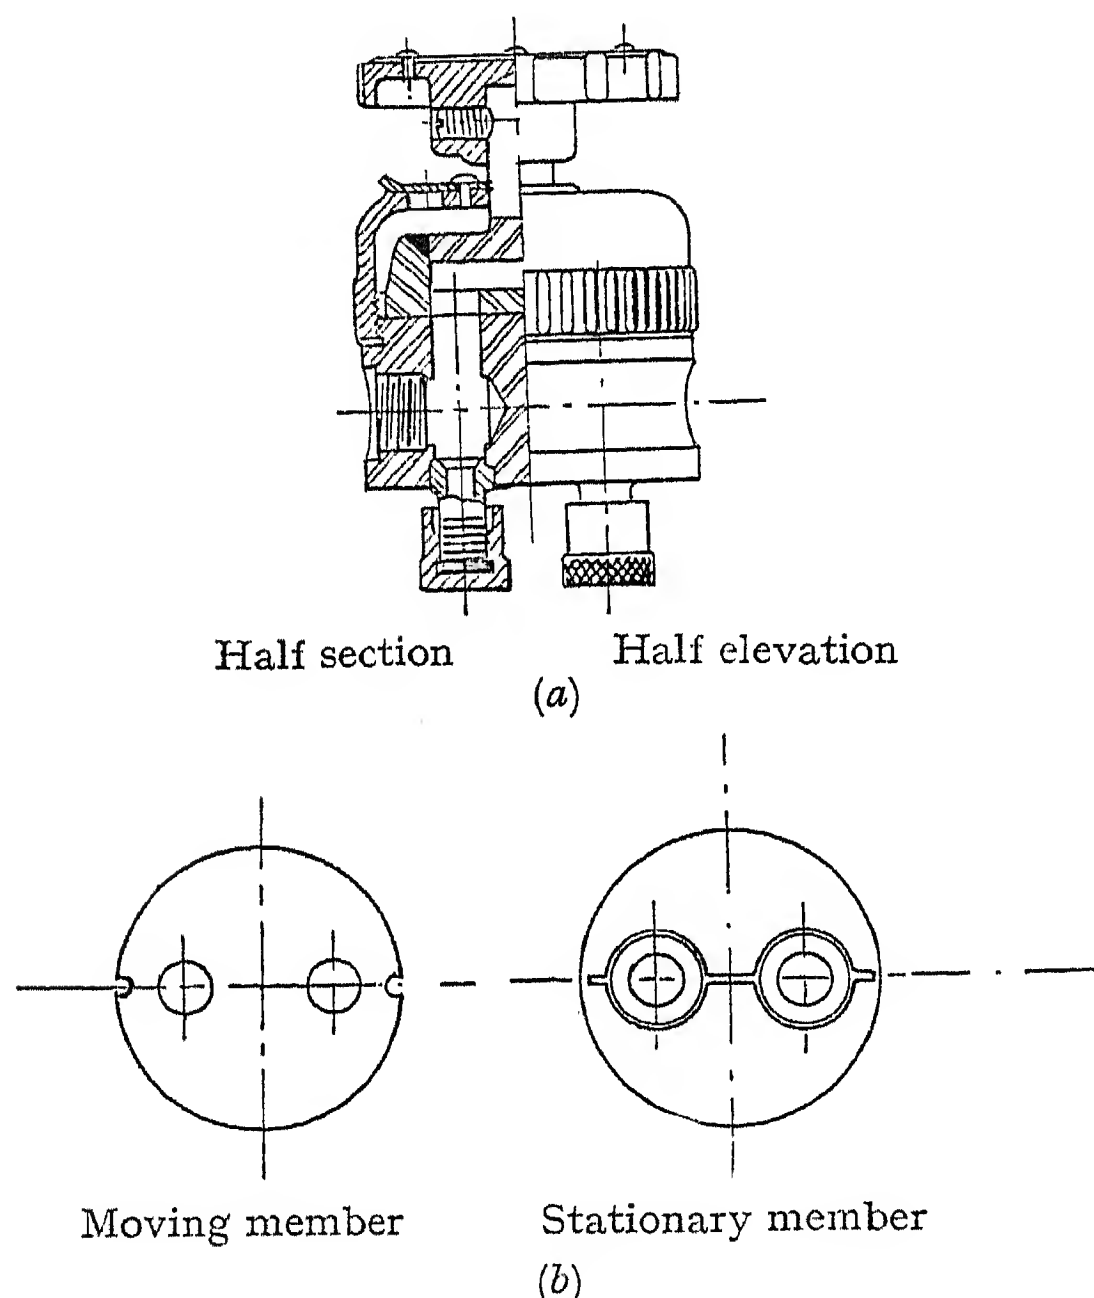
Metal tap. The lapped faces and oil-sealing grooves are shown in (b).
